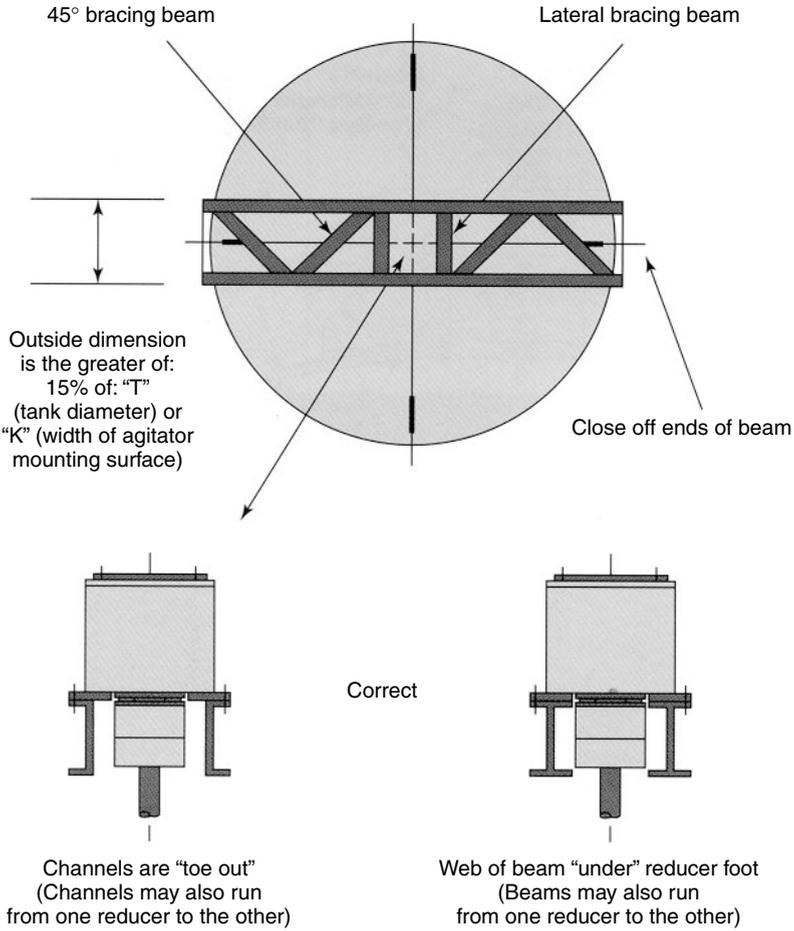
Drive mounting loads: beams and nozzles. (Courtesy of Chemineer.)
